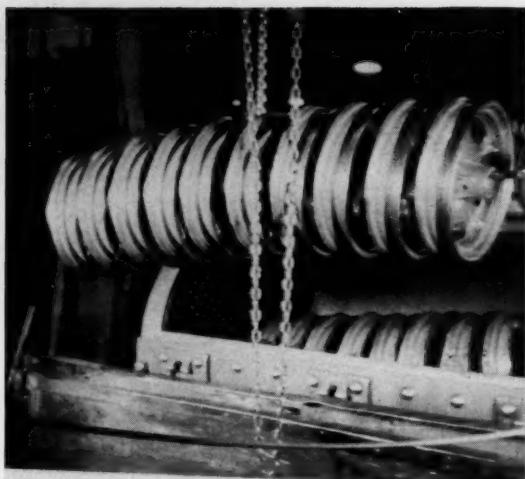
Wheels being removed from tumbling mill. The bar through the center allows milling without wearing or breakage.
